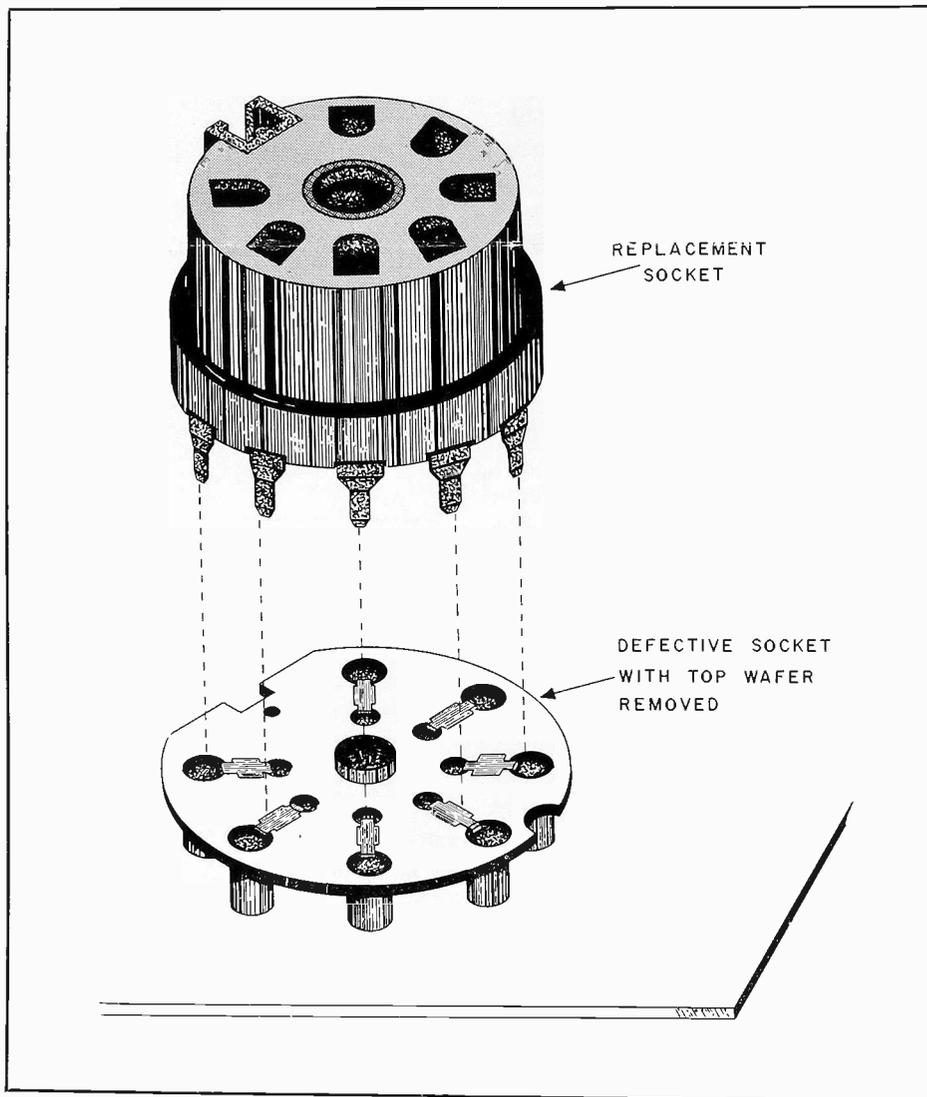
Repair without removal of defective socket by insertion of Sylvania type printed circuit socket.
